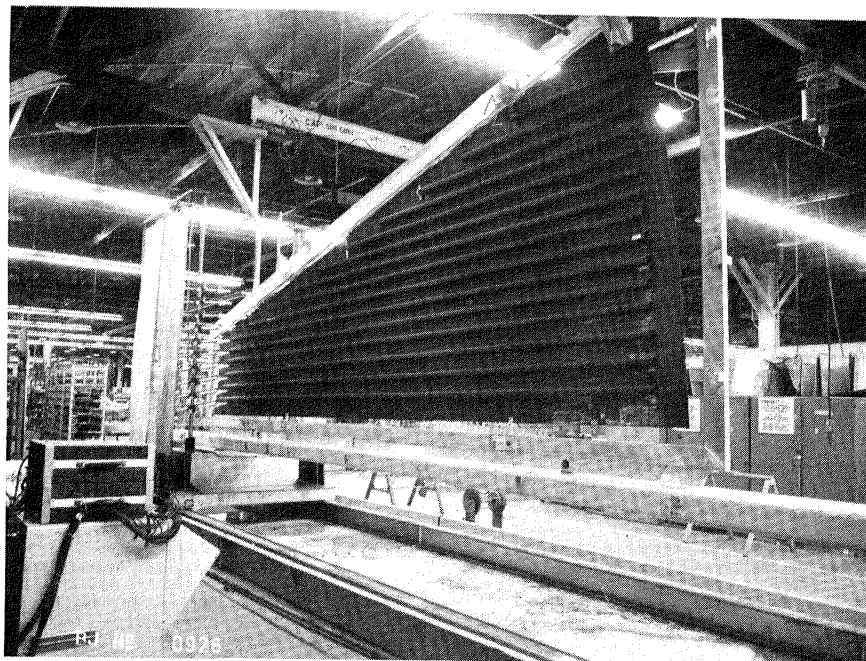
Cured Assembly Ready for Ultrasonic Inspection
